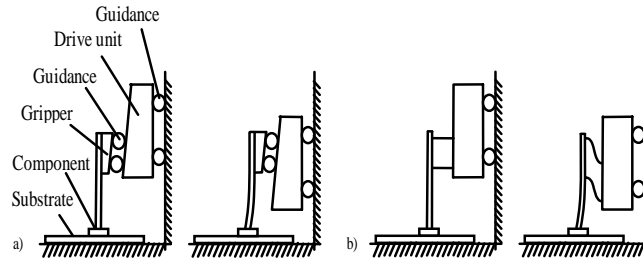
Movement of drive unit out of line relative to main axis gripper, tension build-up in gripper needle due to the relative lateral displacements: a) roller bearing or sleeve bearing guidance, b) material hinge or leave spring guidance.
